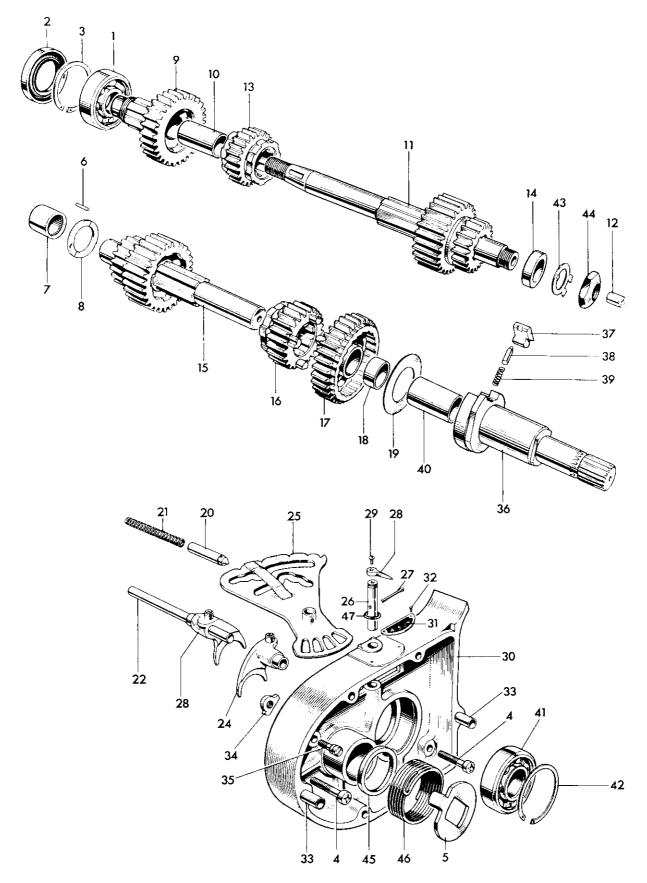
GEARBOX SHAFTS, BEARINGS AND INNER COVER
